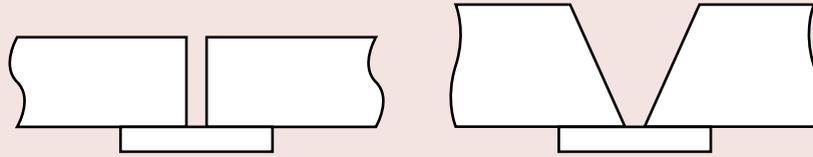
Flux Cored Arc Welding of Plain Carbon and Low Alloy Steels Using External Shielding Gas
